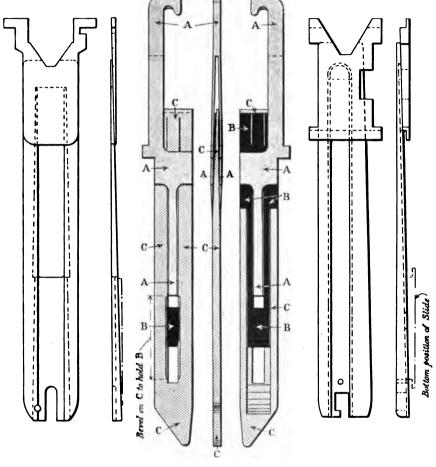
Linotype; wedge-space matrix, or space-band. Scale: full size. FIG. 202.—Monoline; wedge-space matrix. Three views showing the three combined sliding pieces, A, B, C. Scale: full size.
